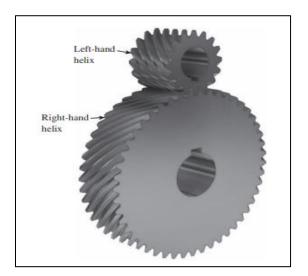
Helical gears in mesh. These gears have a 45° helix angle[1].
